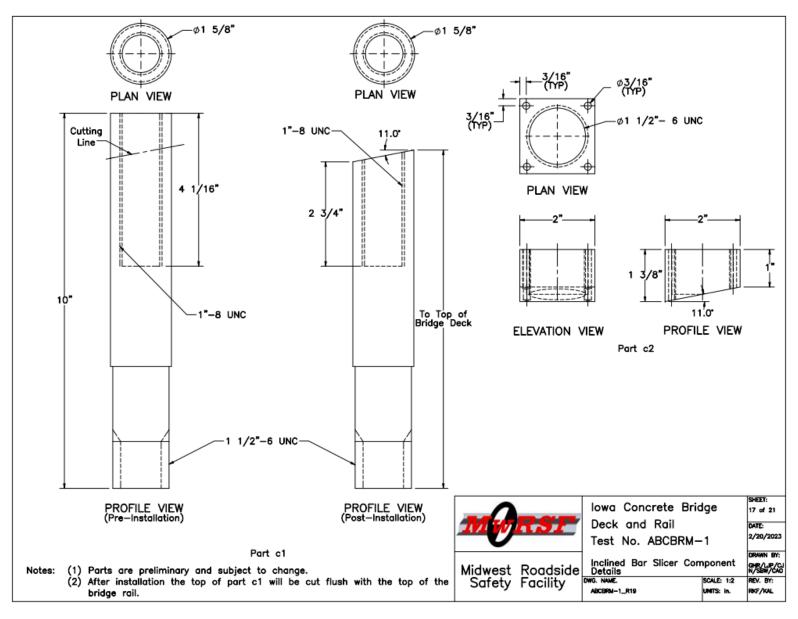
Inclined Bar Slicer Component Details, Test No. ABCBRM-1
